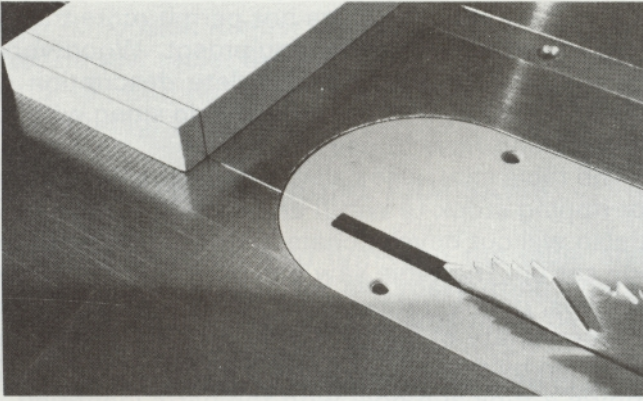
Line scribed on saw table will help you align stock for more accurate cutting to a line. This line should align with left side of saw kerf.
